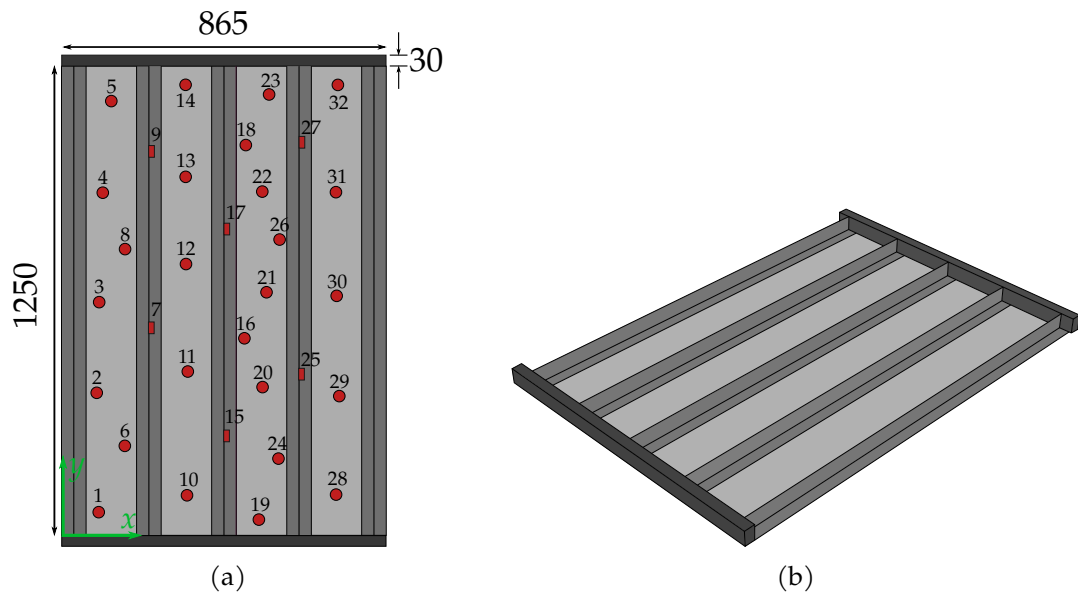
Geometric properties of L2 coupons: front view with sensors (a) and 3D view (b). All dimensions are in mm.
